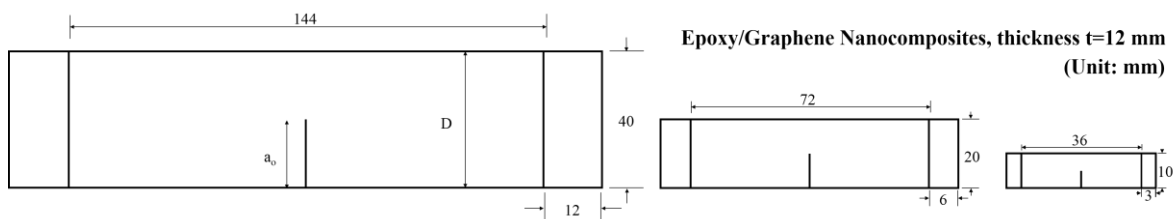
Geometry of Single Edge Notch Bending (SENB) Specimens. Units: mm.
